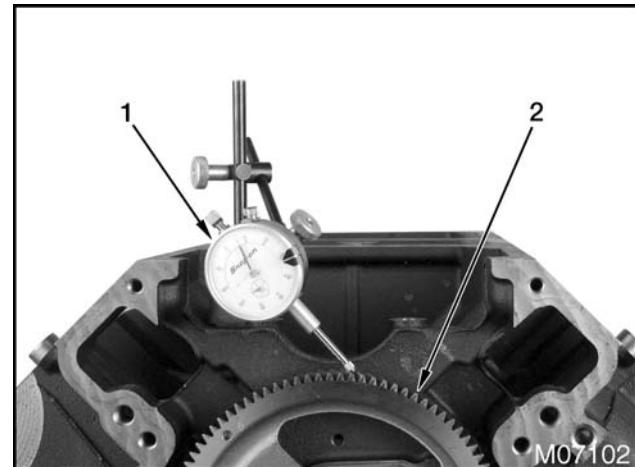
Camshaft assembly gear backlash check (camshaft gear to crankshaft gear)
